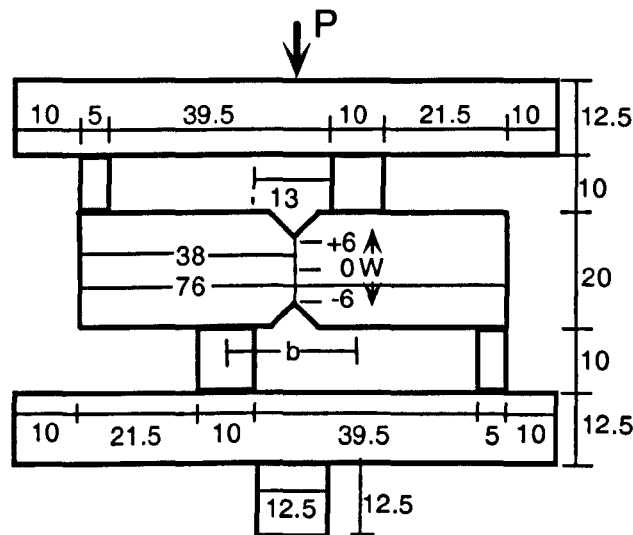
Schematic of ASTM shear coupon loading in AFTB fixture.
